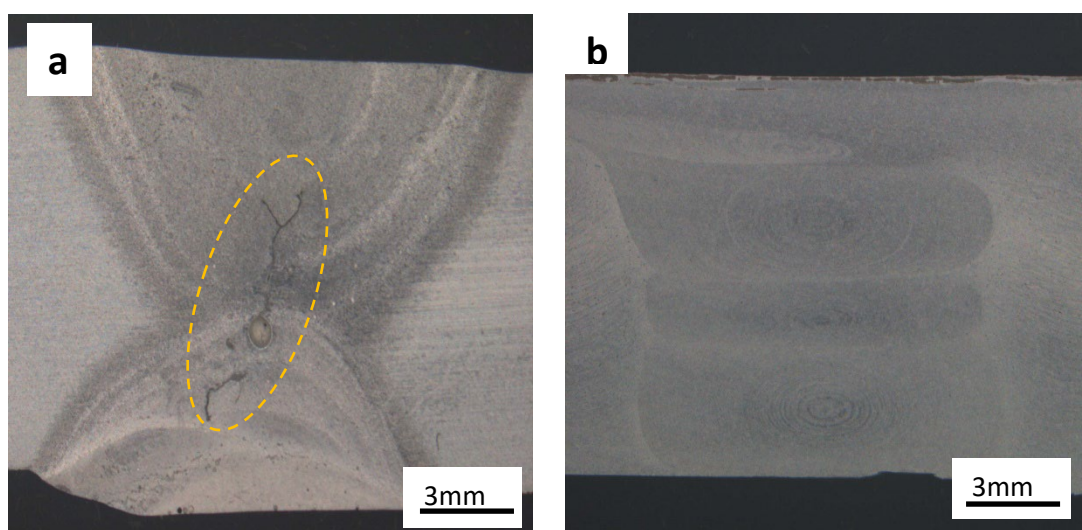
(a) Macrograph of TIG-welded joint; (b) Macrograph of friction stir welded joint
